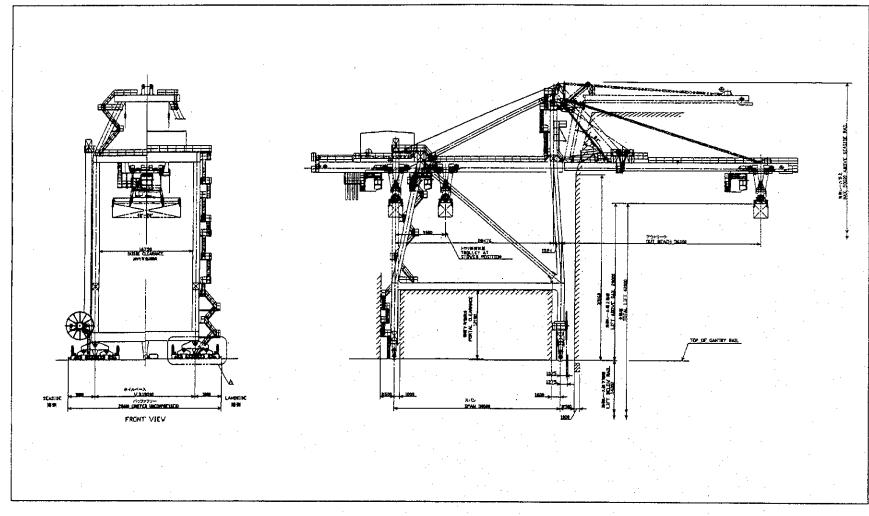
Typical Sections of Quay Gantry Crane
